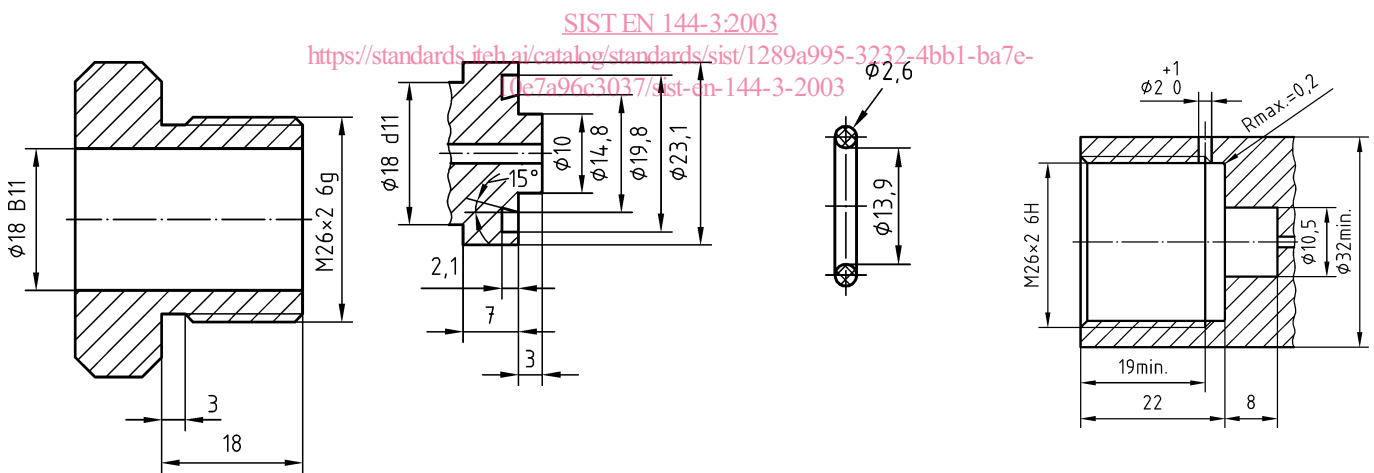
Handwheel Figure 2d) — Connector Figure 2e) — O-ring Figure 2f) — Valve outlet
